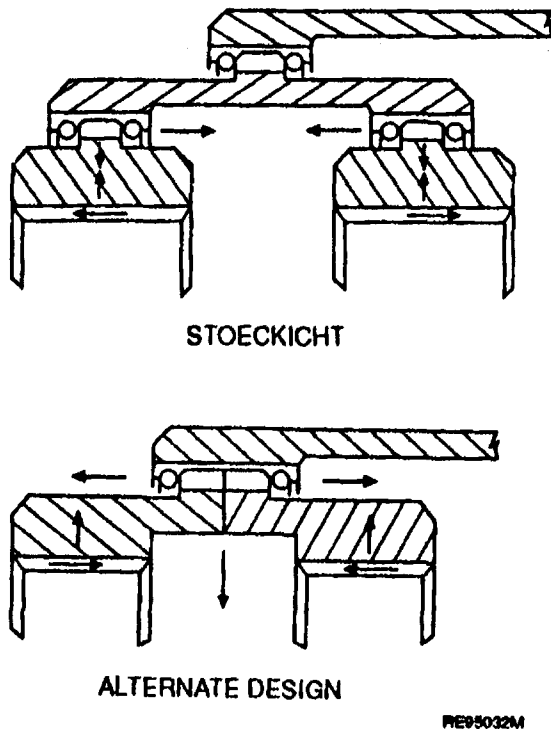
Principles of Stoeckicht and alternate (Allen gears) star epicyclic designs
